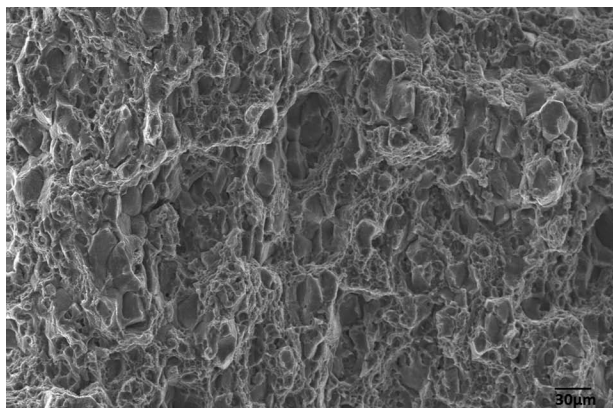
Fracture surface of a room temperature tensile-tested specimen of AA 2219-T87 (8mm thick sheet) tested along the transverse direction
